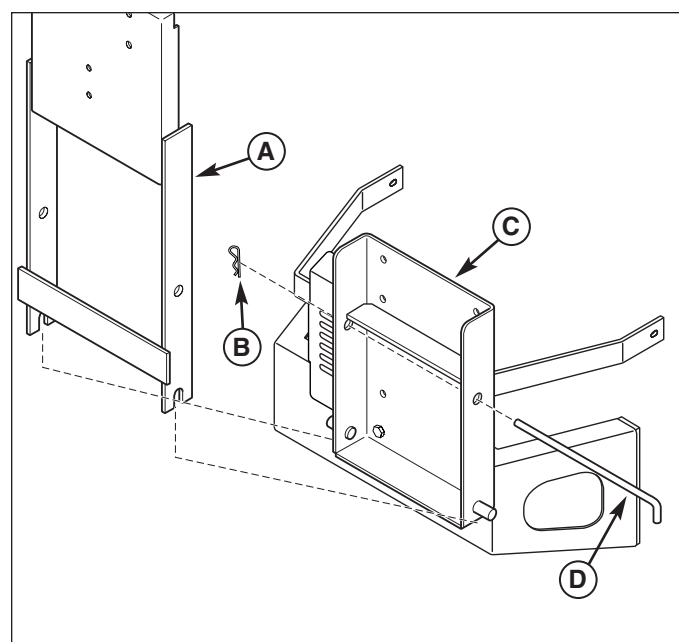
Install Back Plate (Flat Style Bumper shown)
